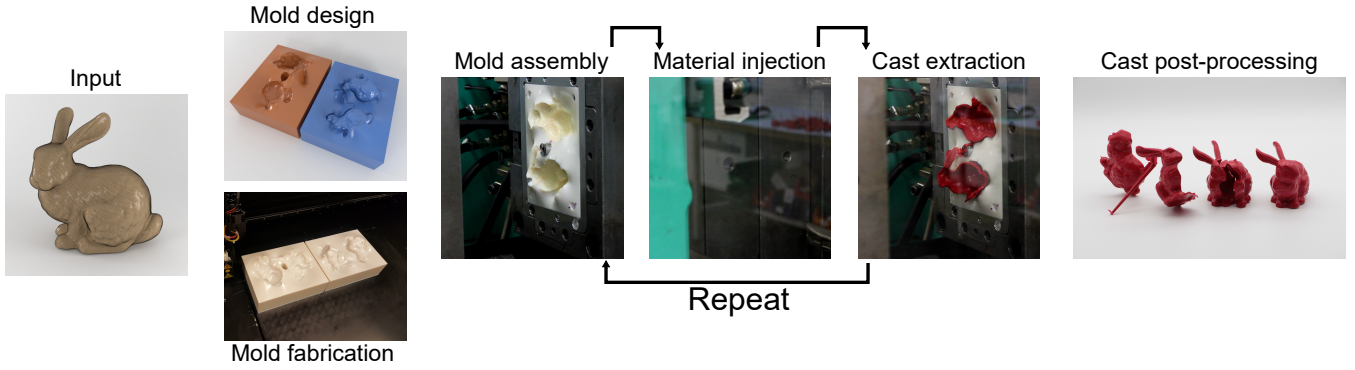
In general, a molding process pipeline based on reusable molds would take the following steps: first, the desired model geometry is analyzed and an adequate mold is designed, depending on the application requirements. The mold is then fabricated; for industrial applications, the mold is typically milled, while for prototypes or smaller productions, 3D printing is often used. Once the mold is ready, the actual molding cycle can be repeated many times to obtain multiple copies of the desired shape. Finally, the post-processing can involve different operations, from assembly of multiple parts to polishing the cast surface.
